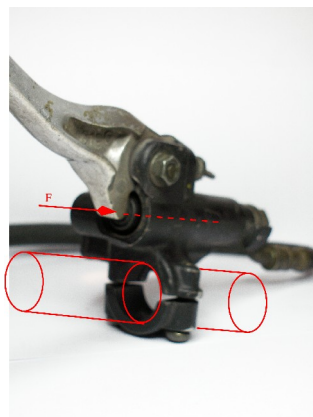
b .Brake fixtures conceptual design and assembly.
